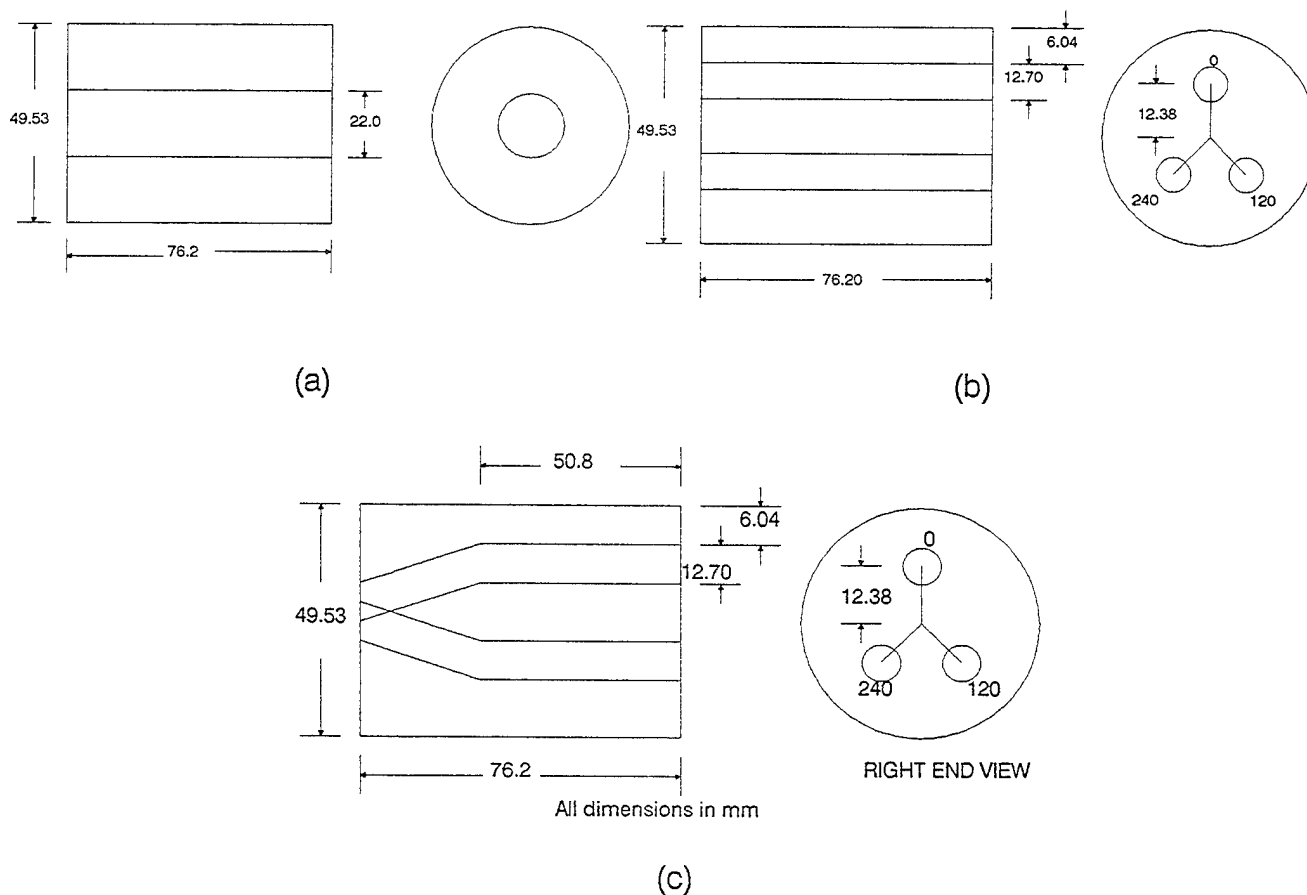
Chamber Insert Configurations. a) Simple Cylindrical Chamber Insert, b) Simple Segmented-Chamber Insert, and c) Transitioned Segmented-Chamber Insert.
